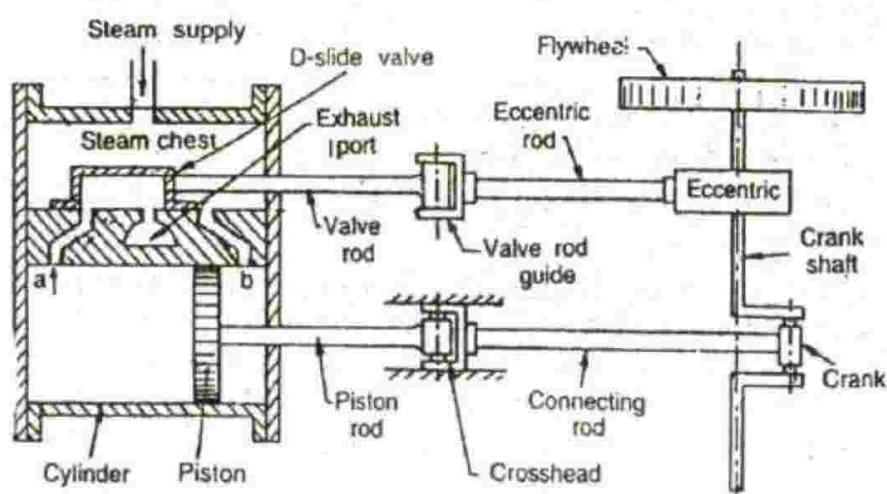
Single cylinder double acting horizontal reciprocating steam engine.
